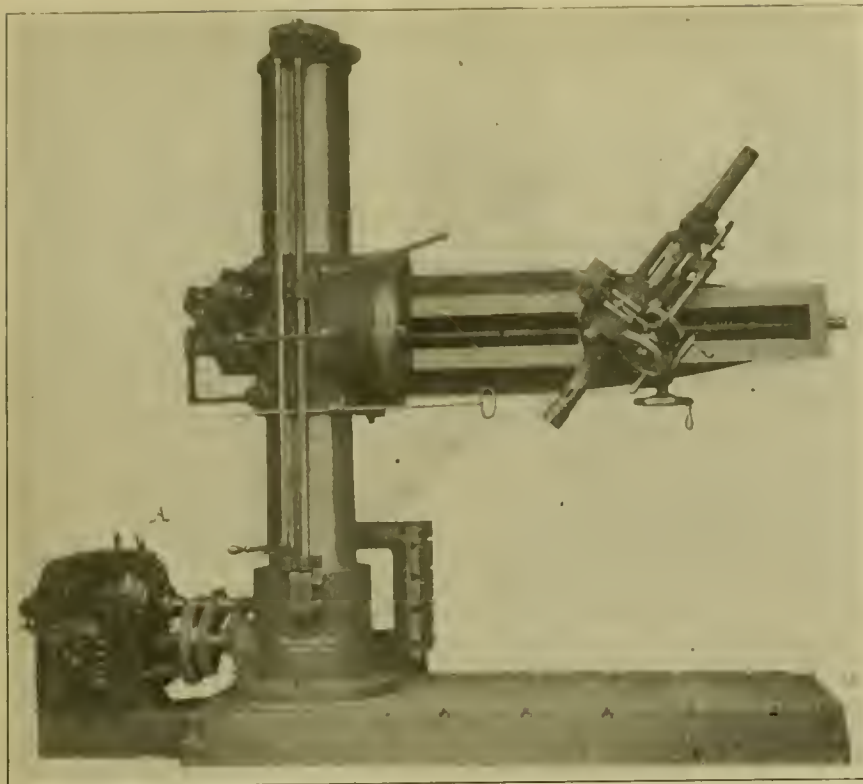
MOTOR-DRIVEN RADIAL DRILL.—DRESES MACHINE TOOL CO.
